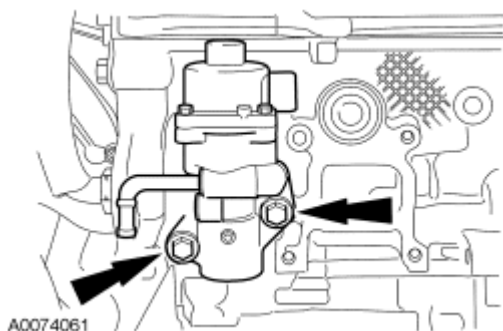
Locating Exhaust Gas Recirculation Valve And Bolts
